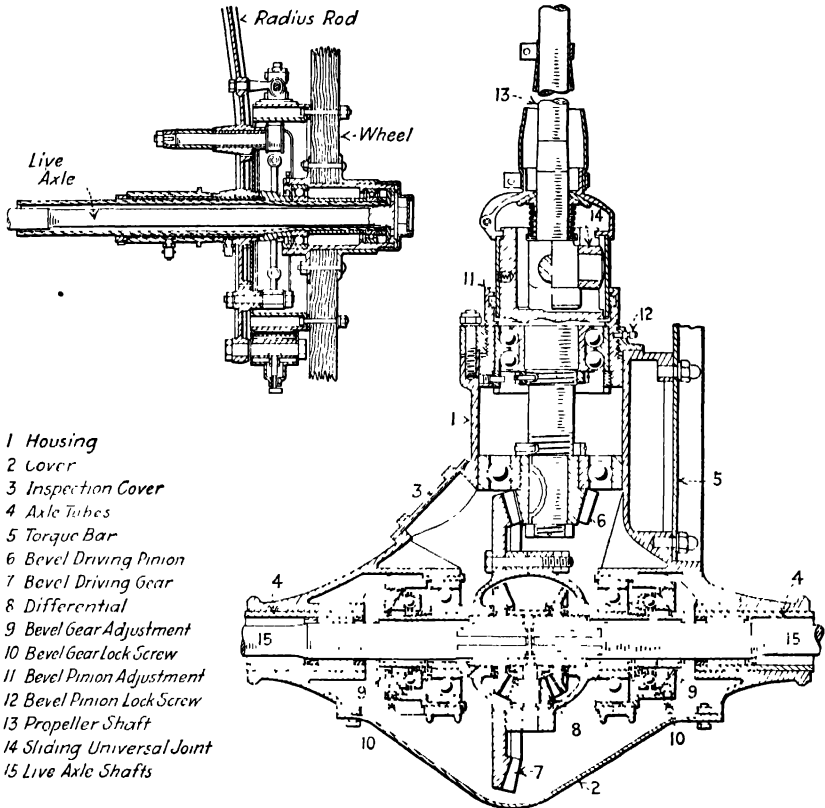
Rear Axle and Propeller Shaft. (Full-floating, Locomobile.)
